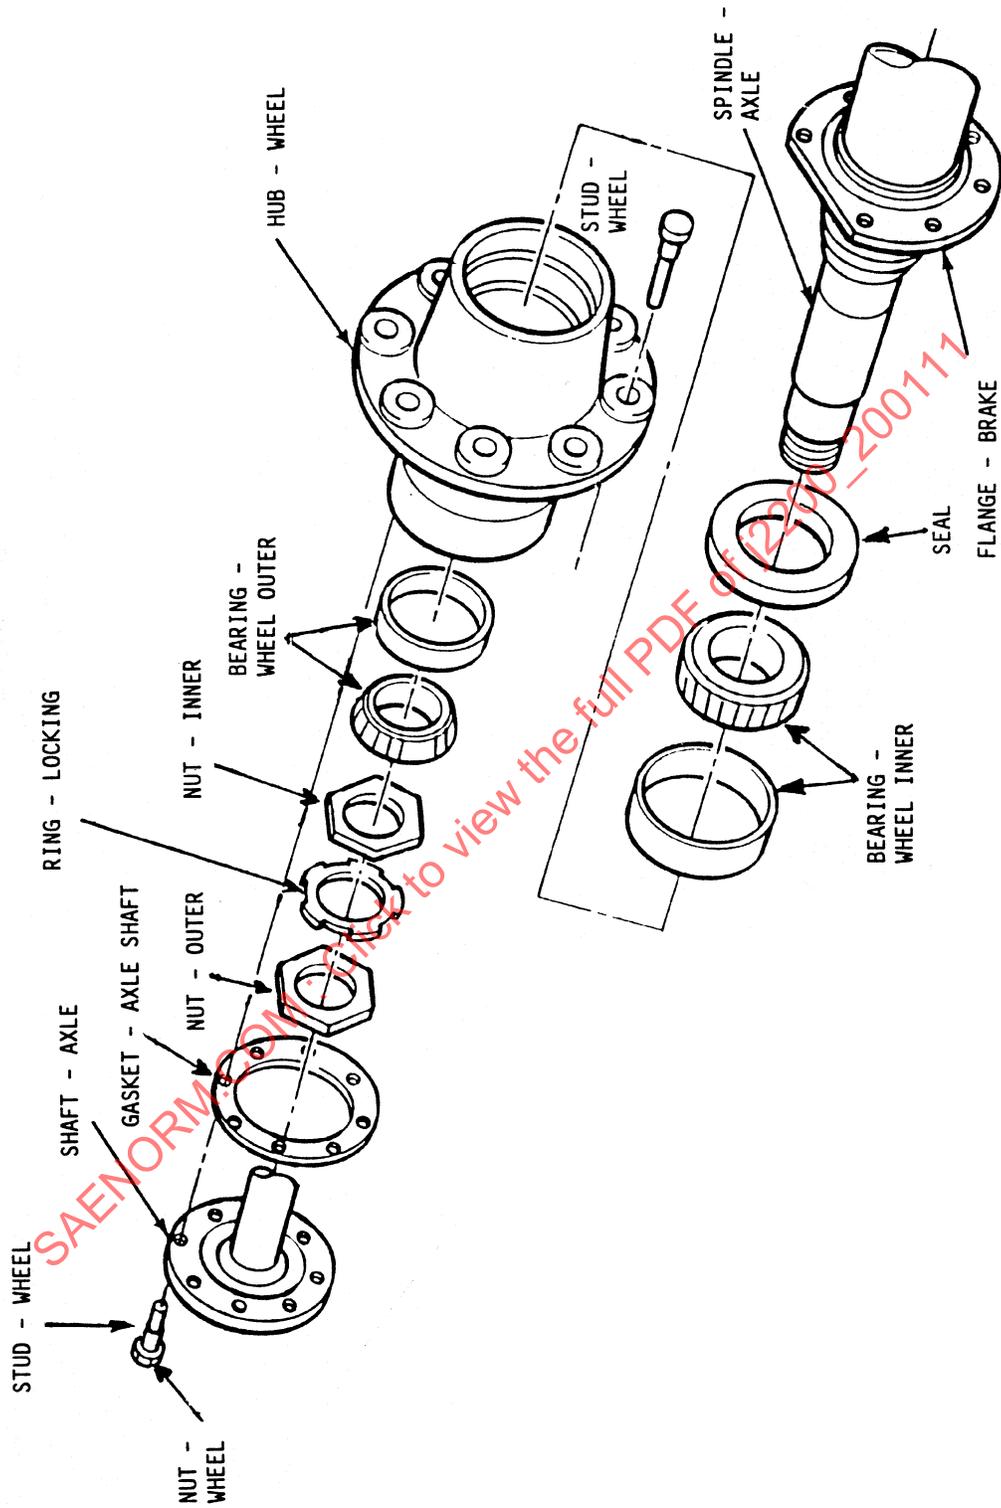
WHEEL END FULL FLOATING AXLE SHAFT
